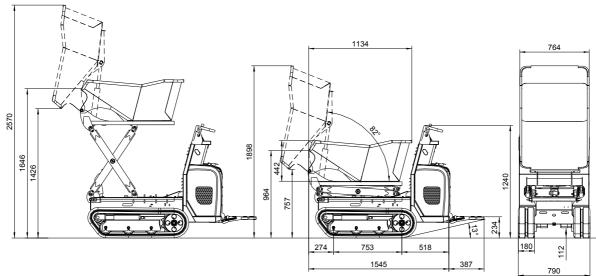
Machine dimensions (model DT08-D with high-tip skip)
